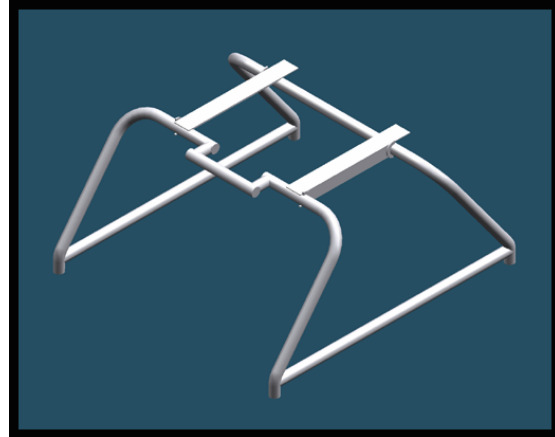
3-D View of Mobile Base in Solid Edge[®].
